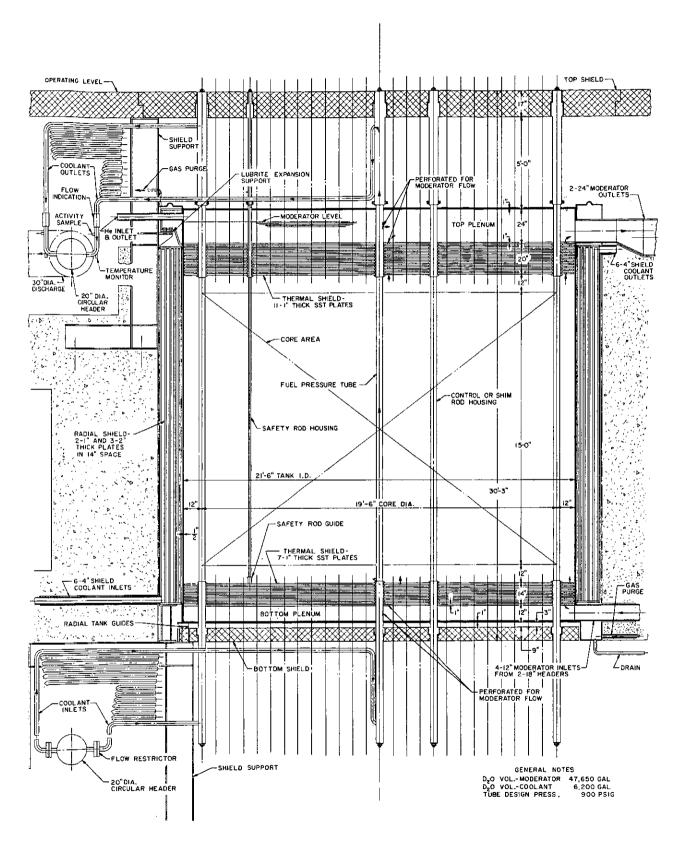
PRESSURE TUBE REACTOR: BOILING - D20 - COOLED, COLD MODERATOR (K SERIES, 430 eMW)
